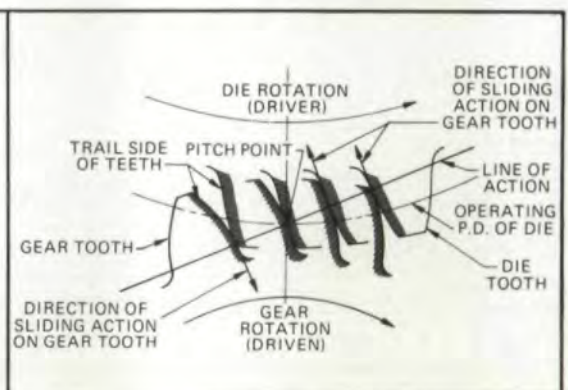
(right)—Contact action between the tooth of a workpiece and the trail side of a rolling die tooth.
